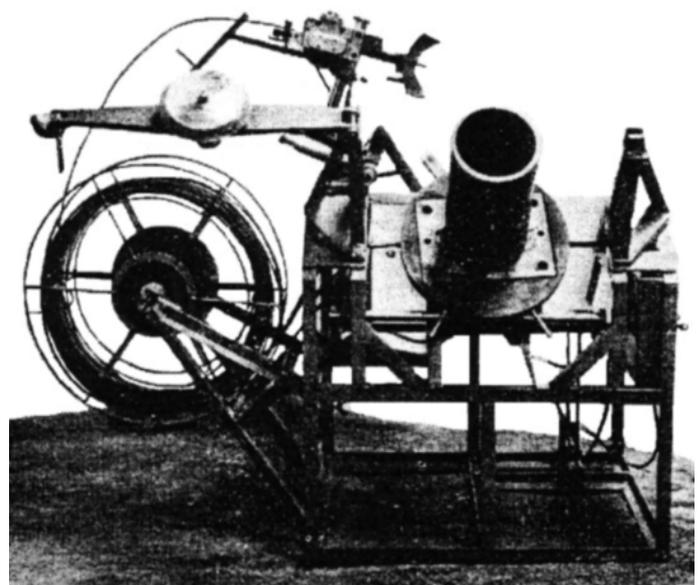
Machine for the steam-shielded welding of train bumpers [42]
